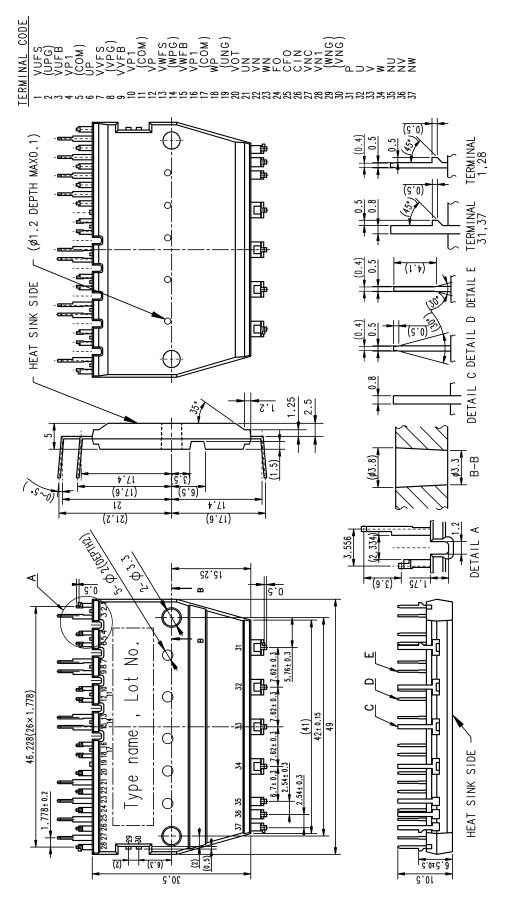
PSSxxS51F6-C control side zigzag terminal type package outline drawing (Dimension in mm)
